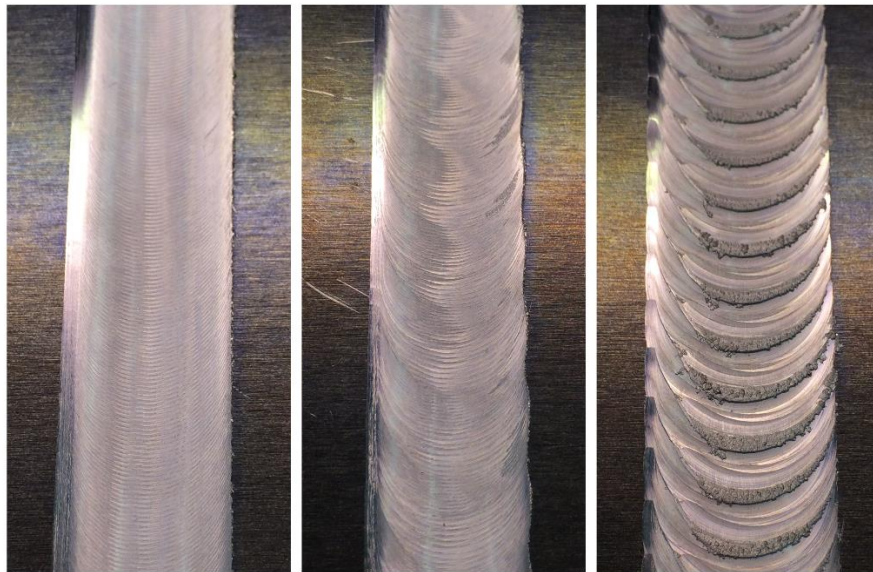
Representative Weld Surface Finishes Created with the Tapered Shoulder Tool: Conventional FSW, Pulsed FSW, and Weaved FSW (Left to Right)
